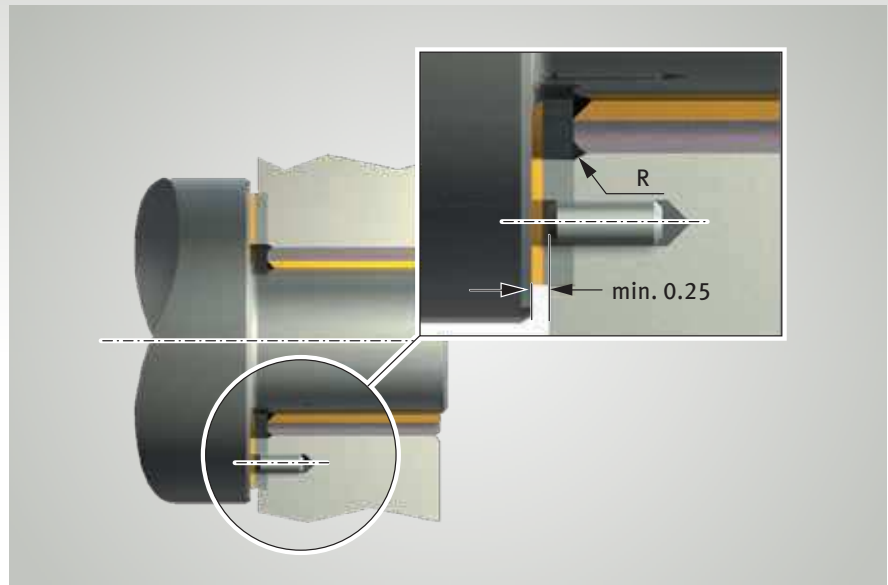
Attaching a PAW thrust washer in a recess in the housing
